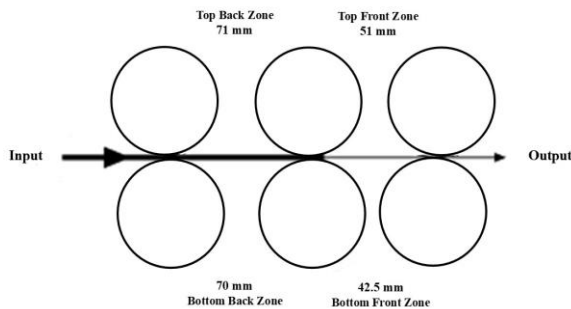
(b): Wider roller gauge setting in Ring frame machine
